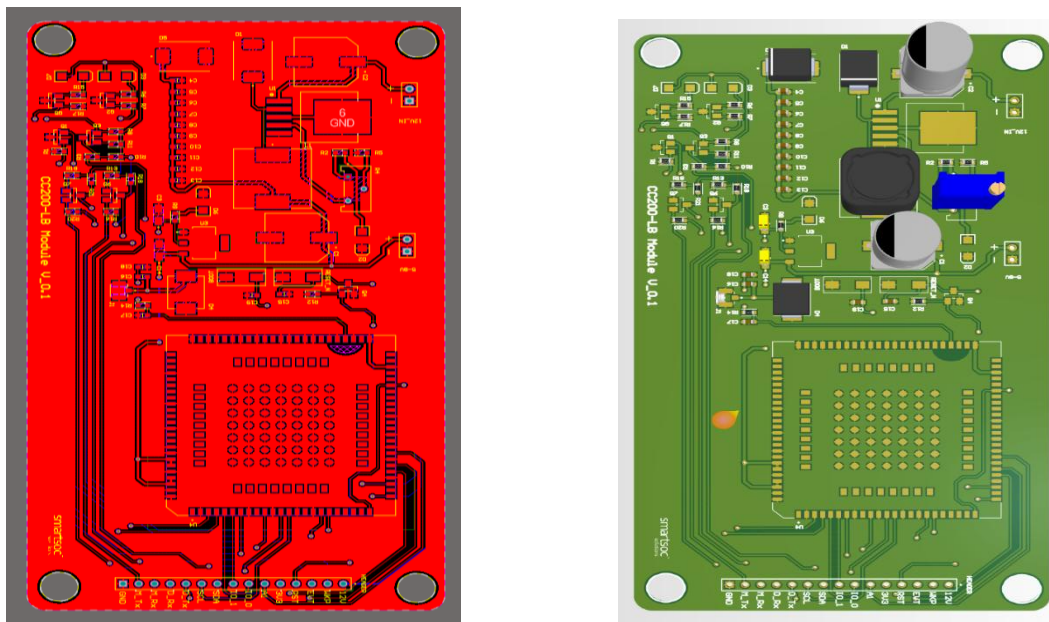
PCB Layout : Satellite Module 2D & 3D
